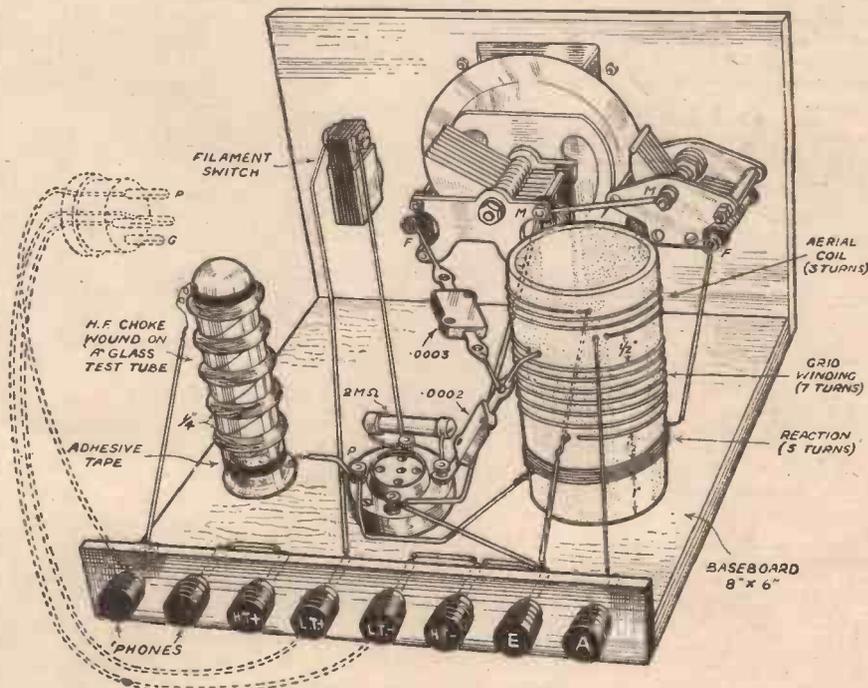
Practical wiring diagram showing the constructional details of the coil and H.F. choke.
